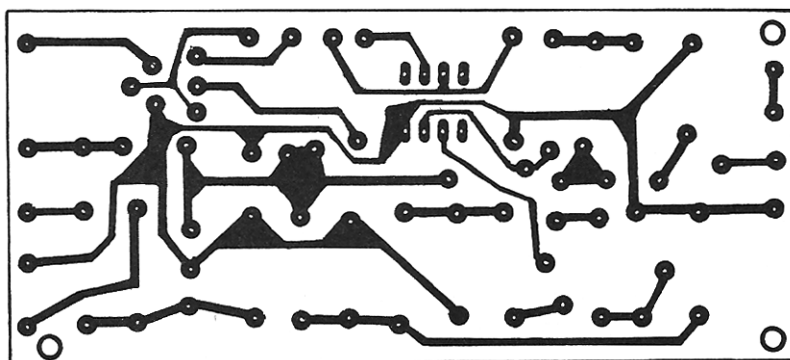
Actual-size PCB layout for refrigerator temperature controller.
